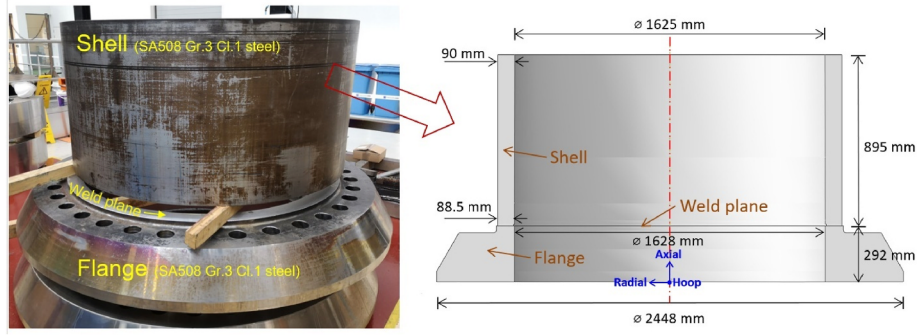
Geometry and configuration of EB welding in the SA508 steel shell and flange (bolt holes in the flange are not considered in the modelling and thus not shown in the sketch).
